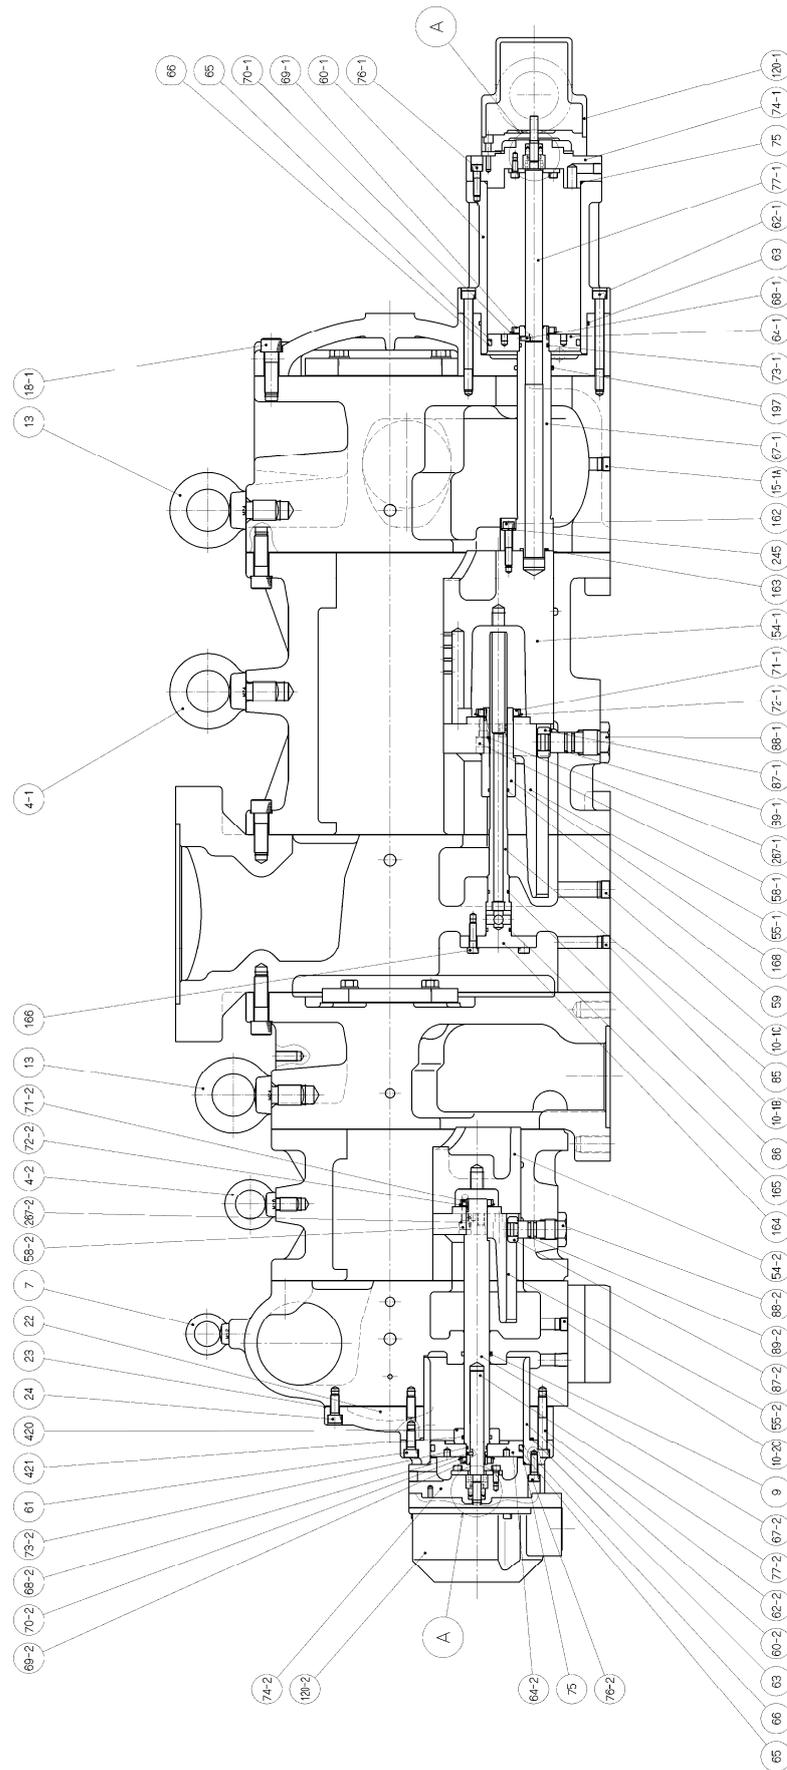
2016LSC Assembly Sectional View (Vertical)
